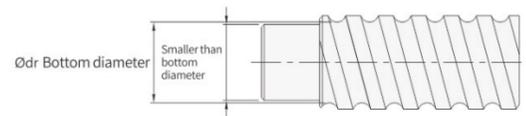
Gear outlet - Necessary condition of inner circulation shaft end
